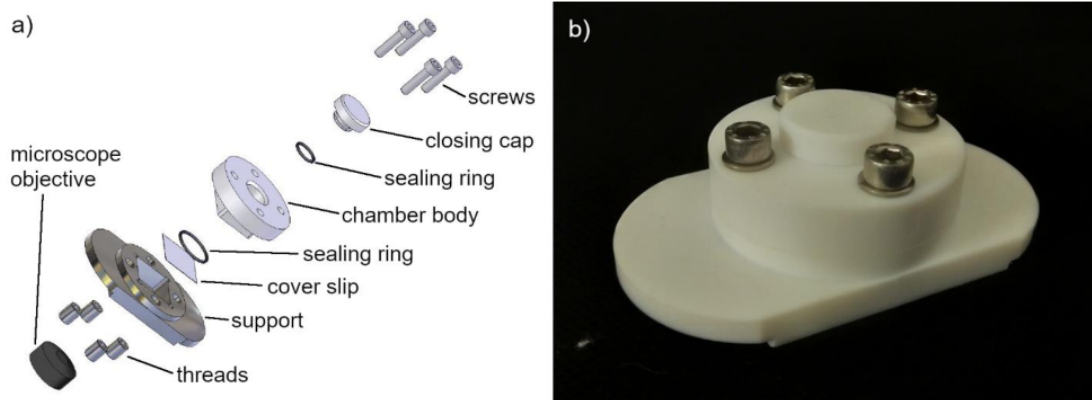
Scheme of FCS-measurement chamber; a) in detail including all involved parts; b) assembled as whole.
